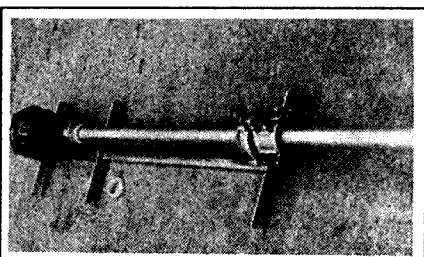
Note that the mast passes through a plastic bearing in the middle support plate. There is about 2mm clearance between mast and bearing. (A spare bearing is shown next to the mount.)
